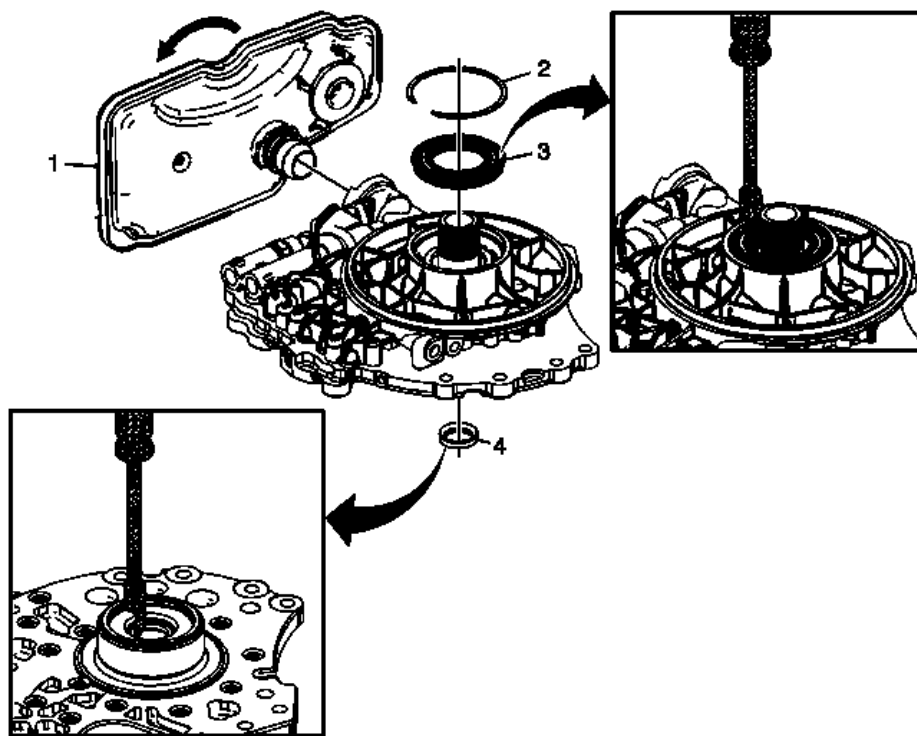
View Of Fluid Filter Assembly & Torque Converter Fluid Seal
